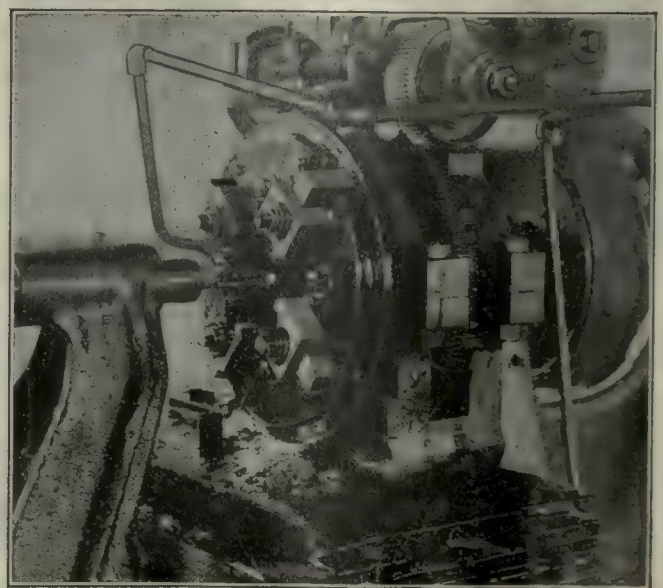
MILLING RELIEVED THREADS ON LARGE PIPE DIES
